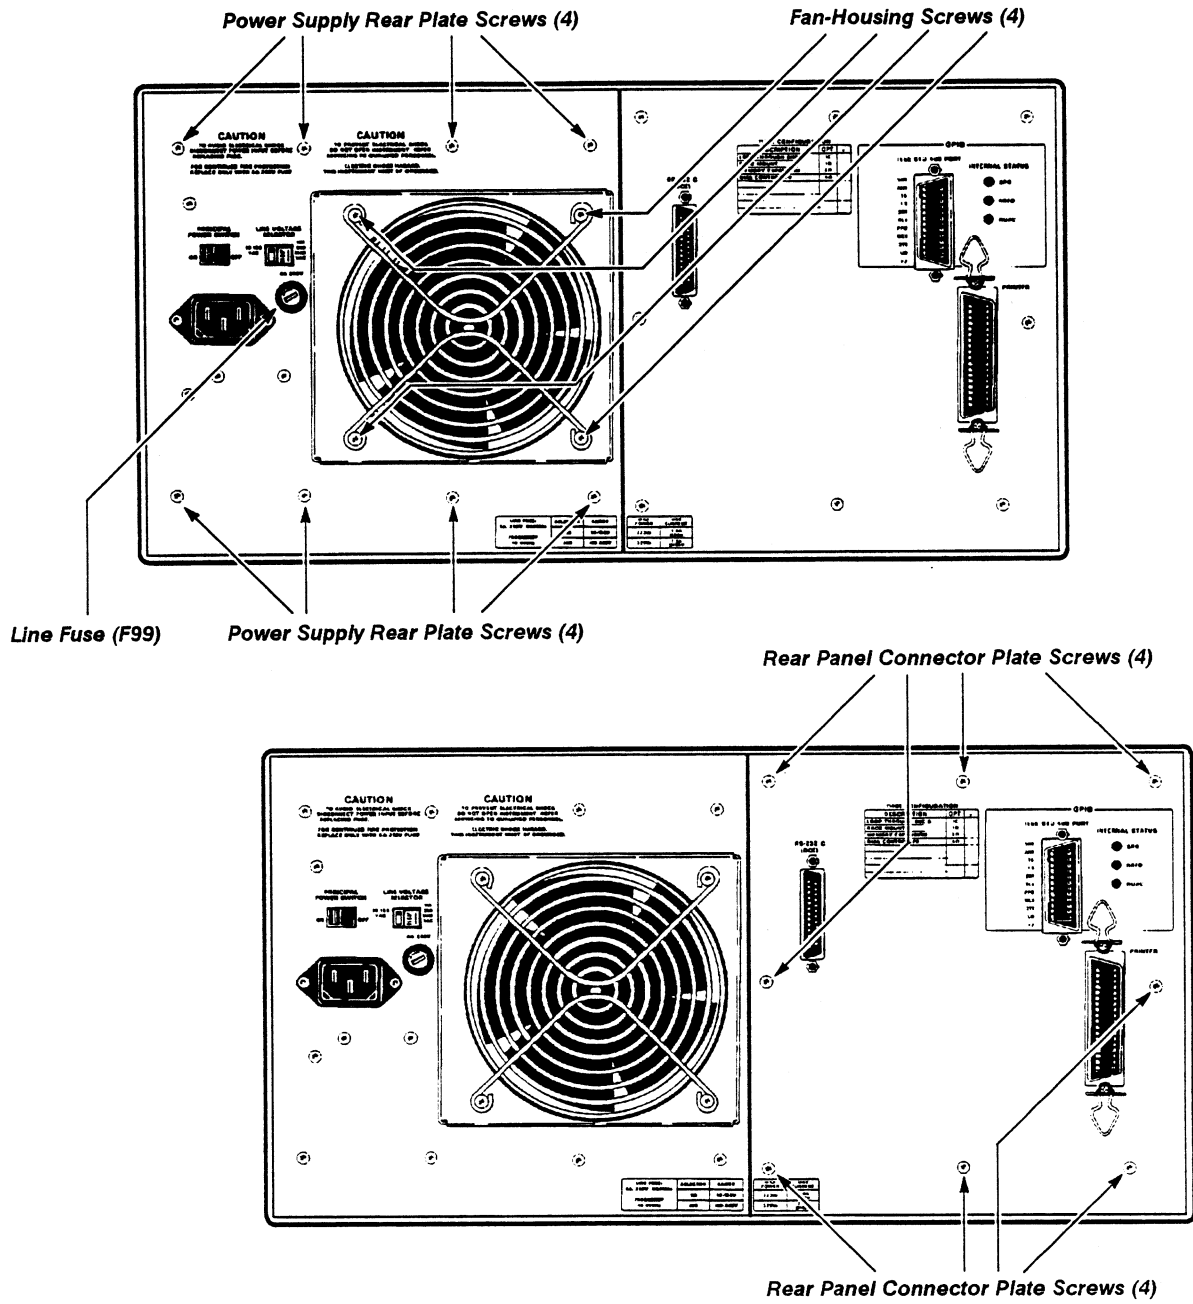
Removing the Power Supply Rear Plate, Fan Housing, and Rear Panel Connector Plate
